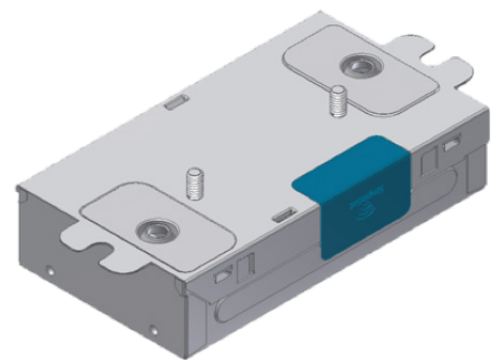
SRB-BS version to mount to (downlight) fixture mounting plate.
